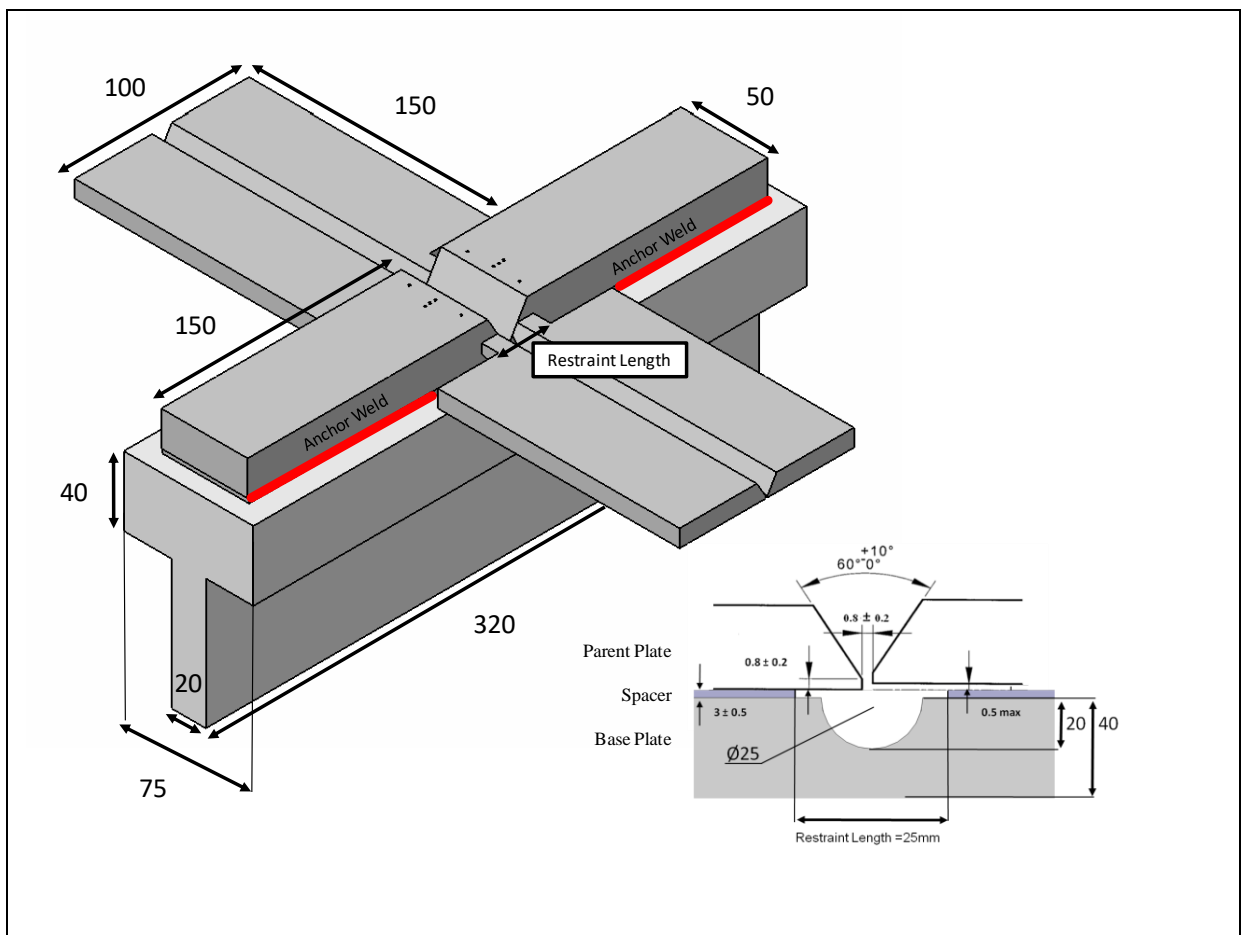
MWIC design: (1) parent plate; (2) run-on and run-off tabs; (3) spacer ;(4) tunnelled backing plate; (5) stiffener. All dimensions in mm.
